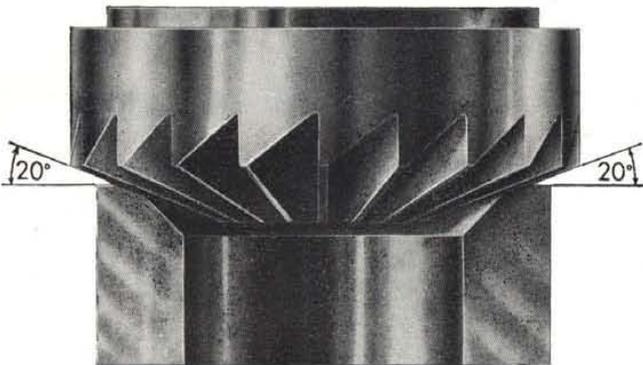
Narrowing valve seat at top with 20° cutter.
